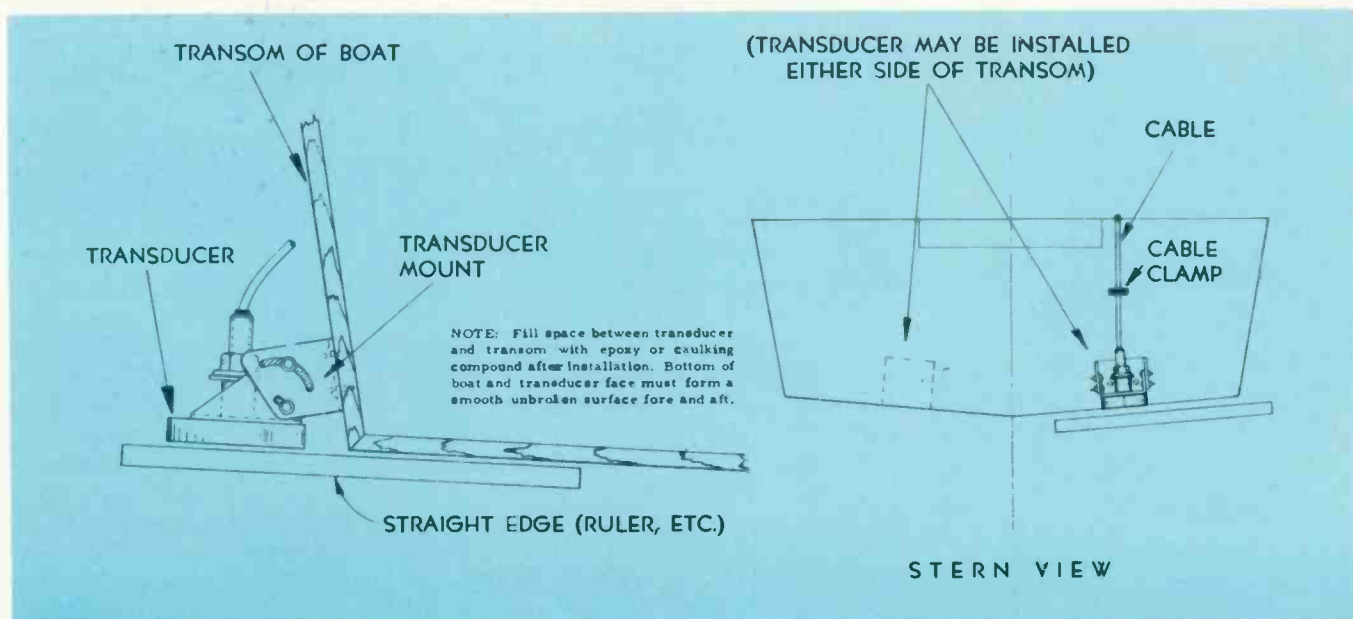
Transom mounted transducer is located off keel center line and placed flush with bottom of boat sideways and lengthwise. (Courtesy Raytheon)
